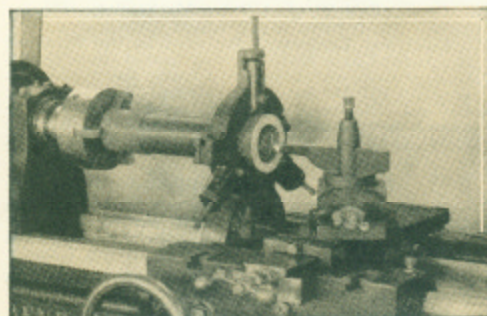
Cutting an Internal Thread in a Large Piece of Work
